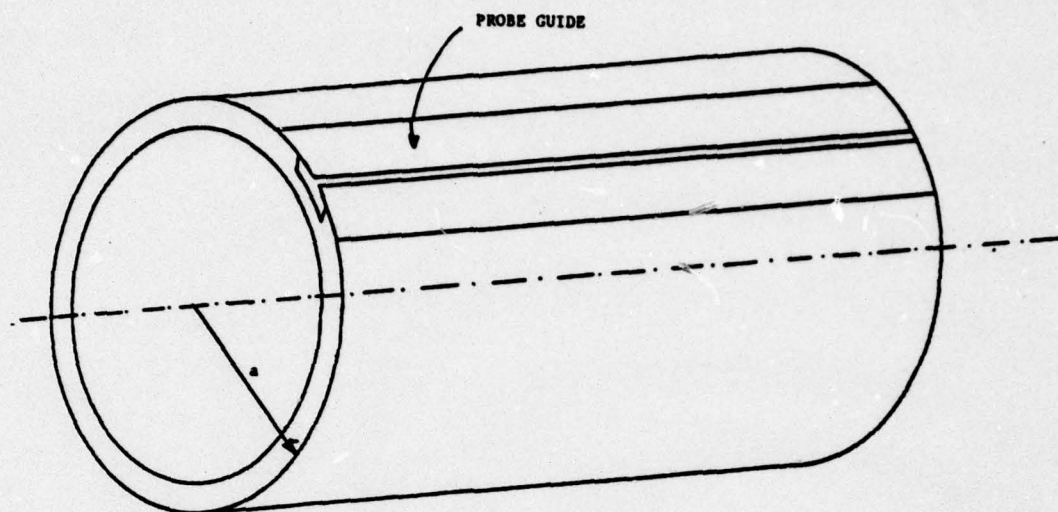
THICK CYLINDER - GROOVED FOR PROBE MOVEMENT
